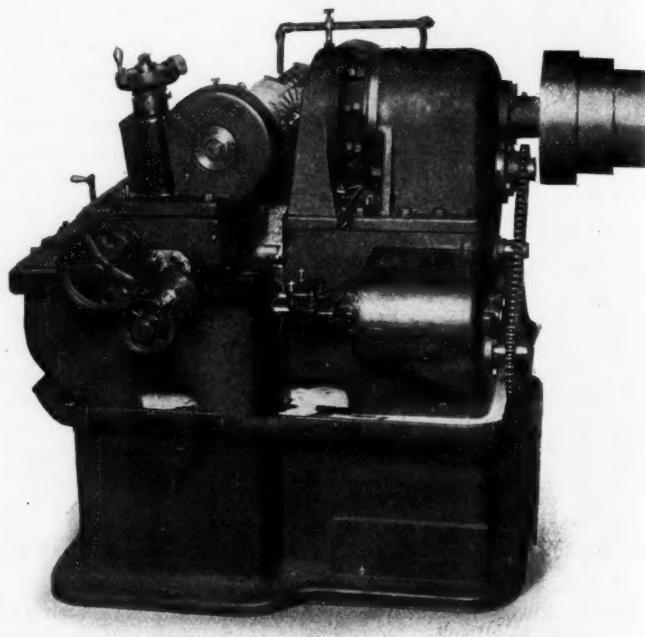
Side View showing Outboard Support for Swiveling Head and Gear Box for Controlling Work Speed
